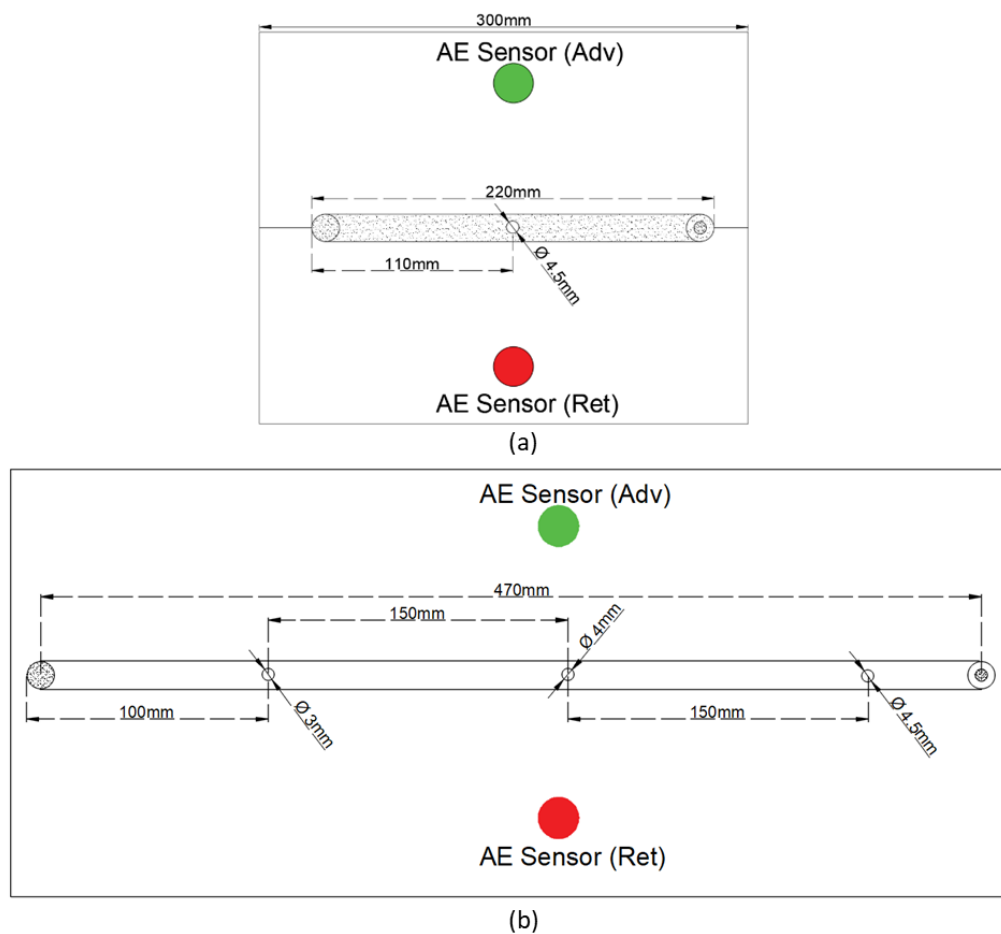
Position of the holes for inducing material disruption in the welds D2 & D3
